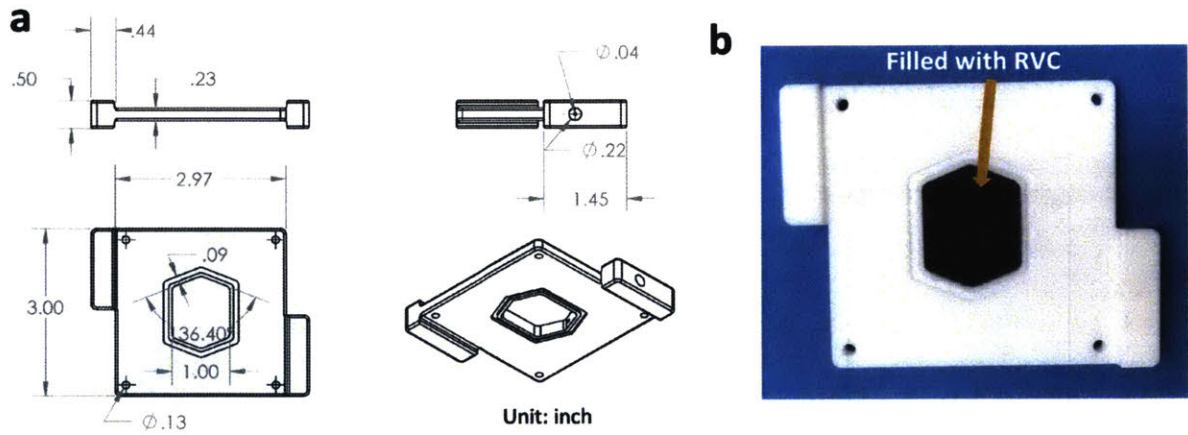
(a) Detailed dimensions for the PEEK electrical insulator; (b) Photo of the PEEK electrical insulator.
